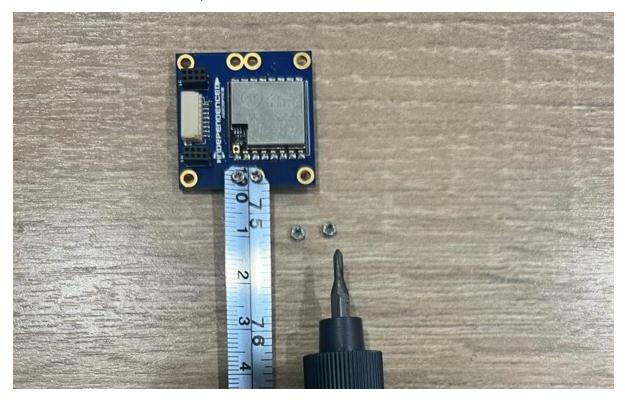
Antenna assembly using M1.6 bolt and nuts(#A015)
